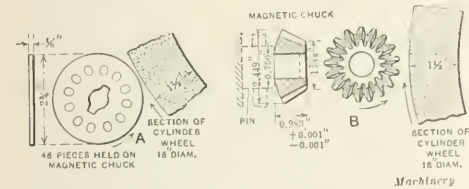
Examples of Meat Chopper Disk and Bevel Pinion Surface Grinding
